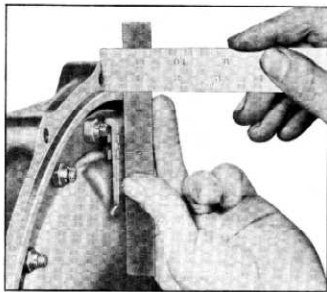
Checking Engagement of Converter Pump Hub with Front Pump Drive Gear
